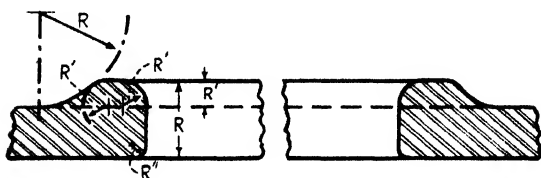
Gradual blending of thick section into surrounding thinner metal. Where bosses are used, they should be blended gradually into the body of the casting. The radius R should equal the section thickness and radius R' equals boss thickness. The radius R'' is included to illustrate that sharp corners should not be used in a design.
